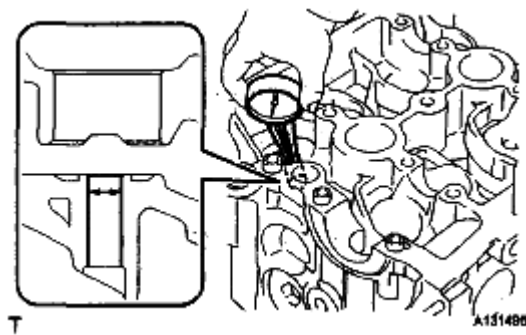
Measuring Bush Bore Diameter Of Cylinder Head
